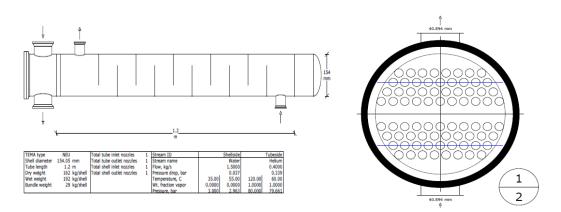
Elevation and tube layout of NEU type heat exchanger
